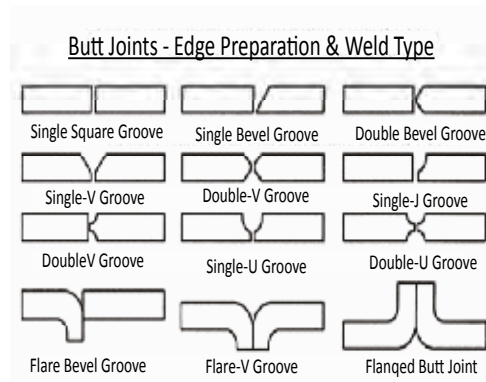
Butt Joints- Edge preparation and Weld Type
